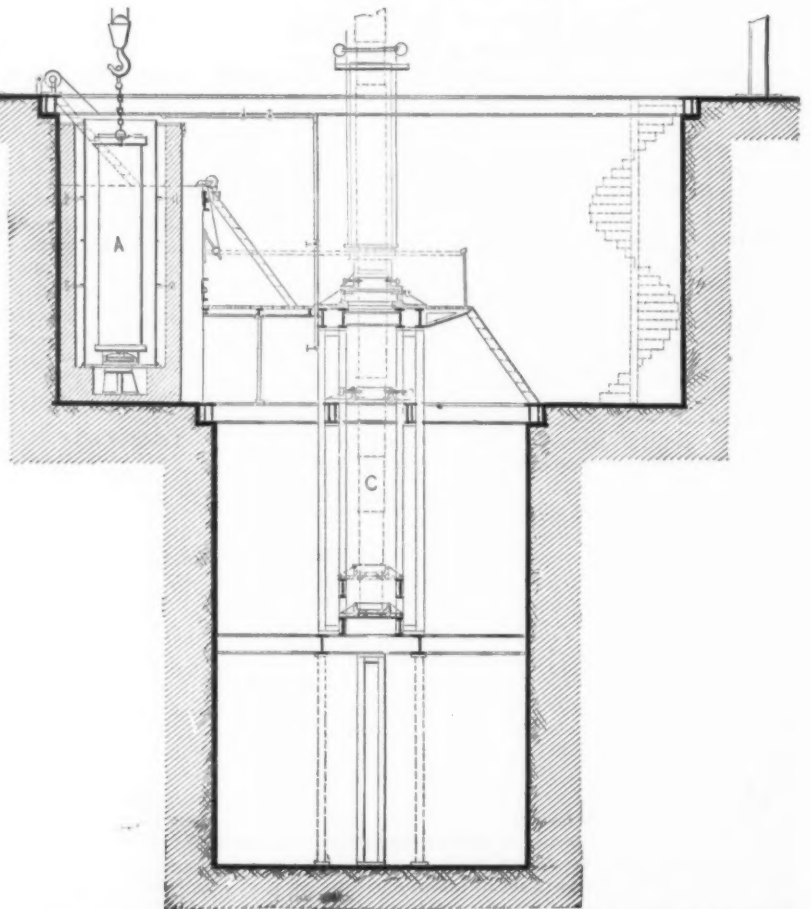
Section of Shrinkage Pit at Right Angles to Fig. 8.
